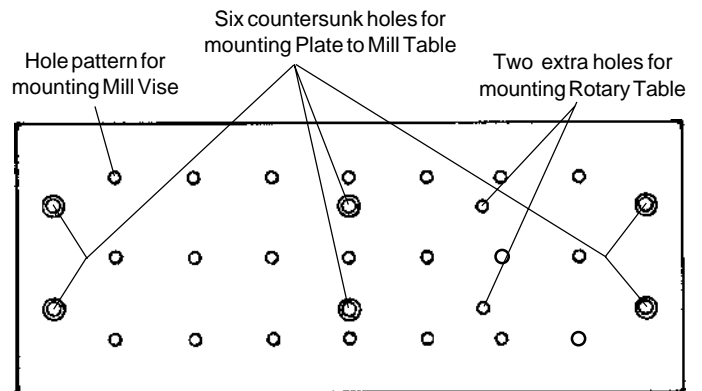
Mill tooling plate hole pattern. Drill additional holes as needed for your particular jobs.
